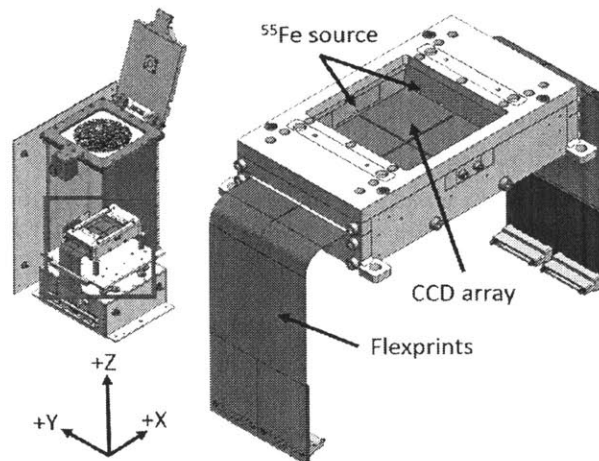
REXIS CCD Sensors in the Detector Assembly Module (DAM) [3]
